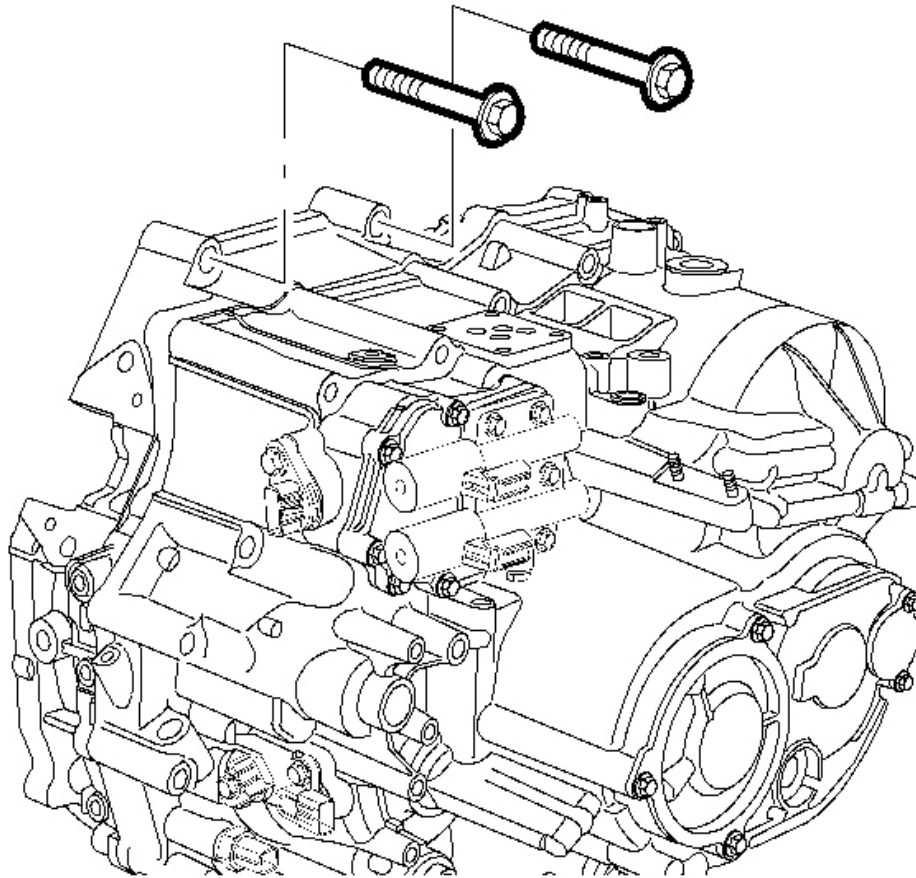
View Of Transmission-To-Engine Mounting Bolts
